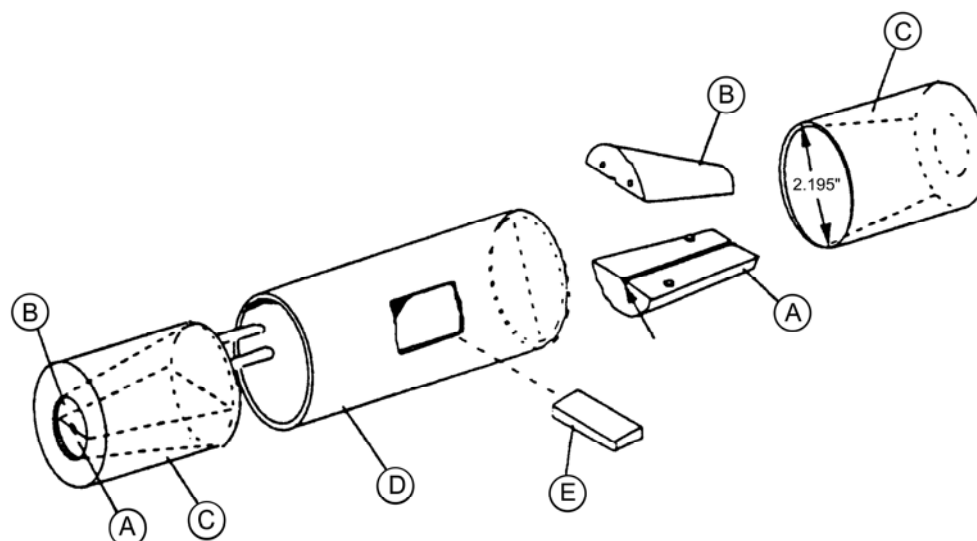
ASTM D3410/D 3410 M: Celanese compression test fixture
